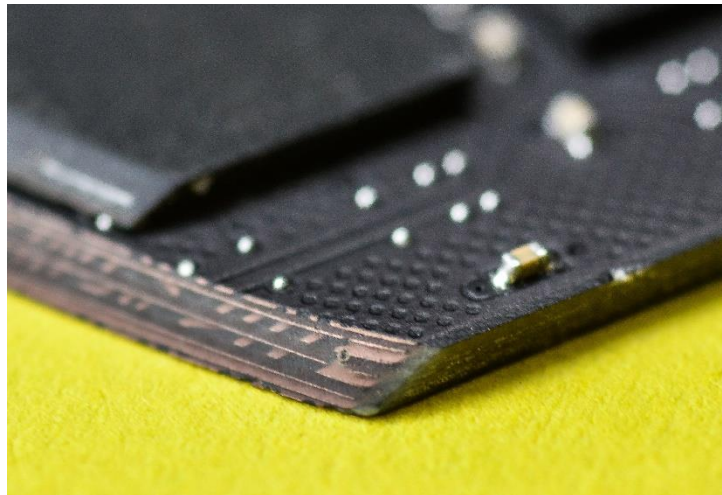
MULTI-LAYER PRINTED MATTER.
